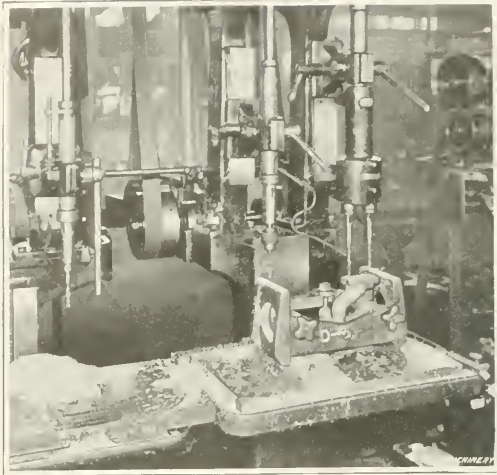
"Avey" Two-spindle Drill Presses and Sellow Drill Head for drilling All Holes in Intake Manifolds without requiring Work to be reset in Fixture
